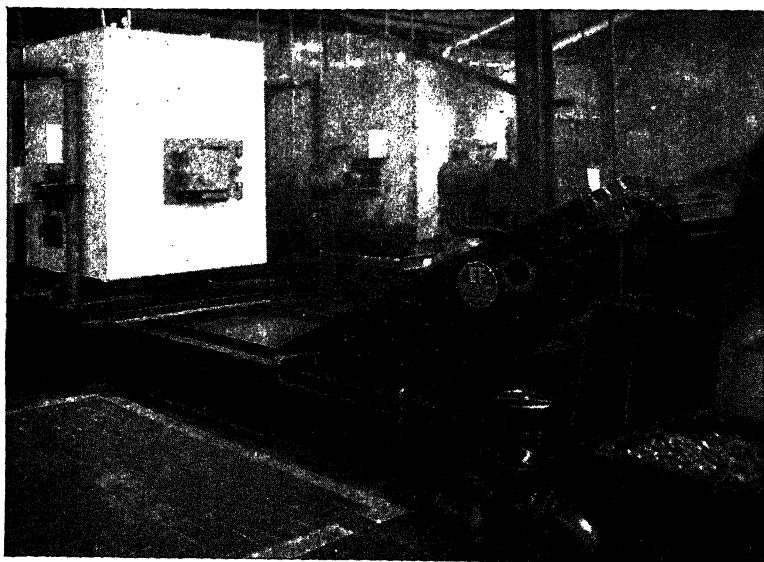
Flight-conveyor quench tank for heavy pieces, used in conjunction with a chain-conveyor furnace. This tank is of the propeller type with internal water coils located in channels shown at the side of the tank. The conveyor discharges into a tote box as shown. Note protective gas generator for supplying protective gas to the furnace for clean or bright heating.
